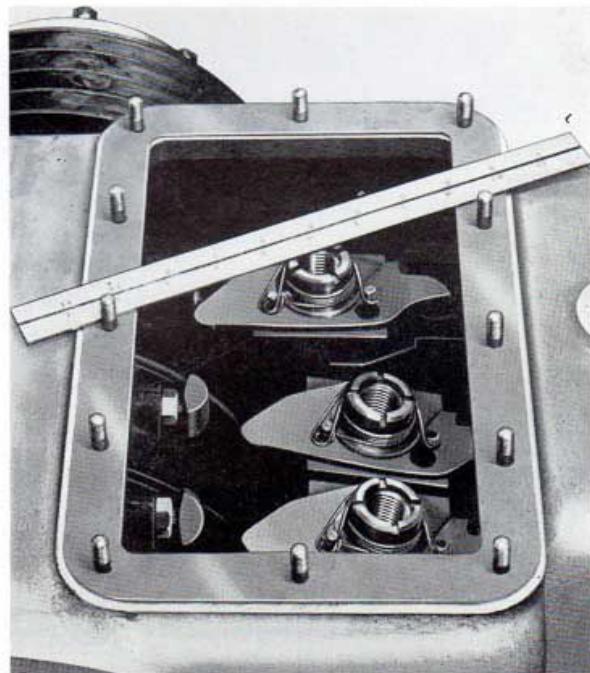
CHECKING MOVEMENT OF ADJUSTER NUT.
